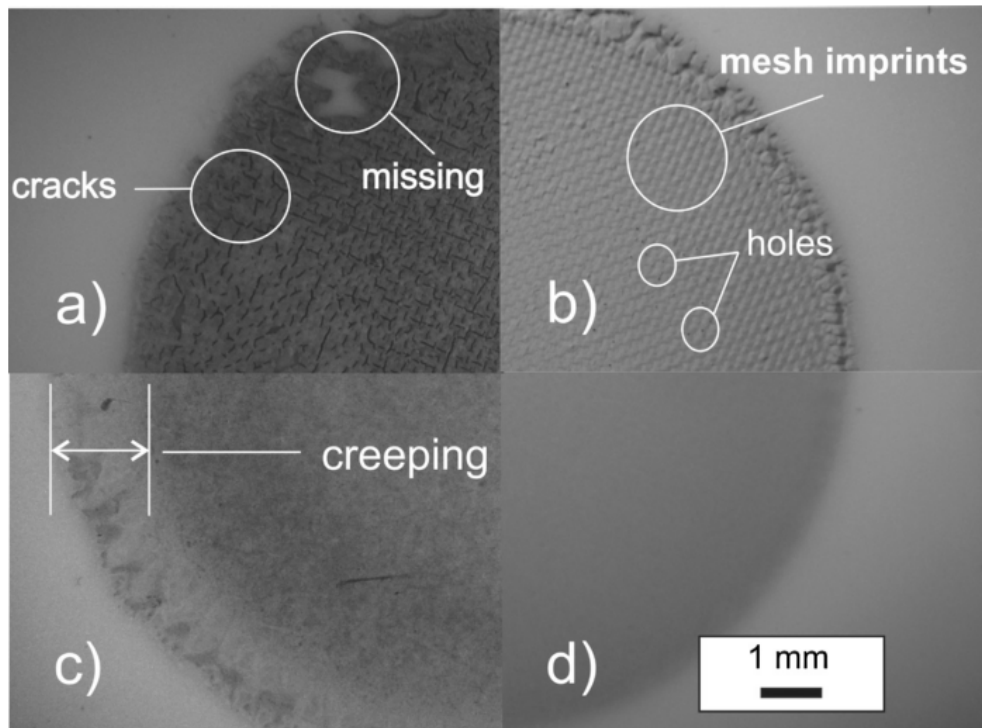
Optical microscope images of screen printed film surfaces displaying common defects (a-c) and an example of a well printed surface (d) [110]
